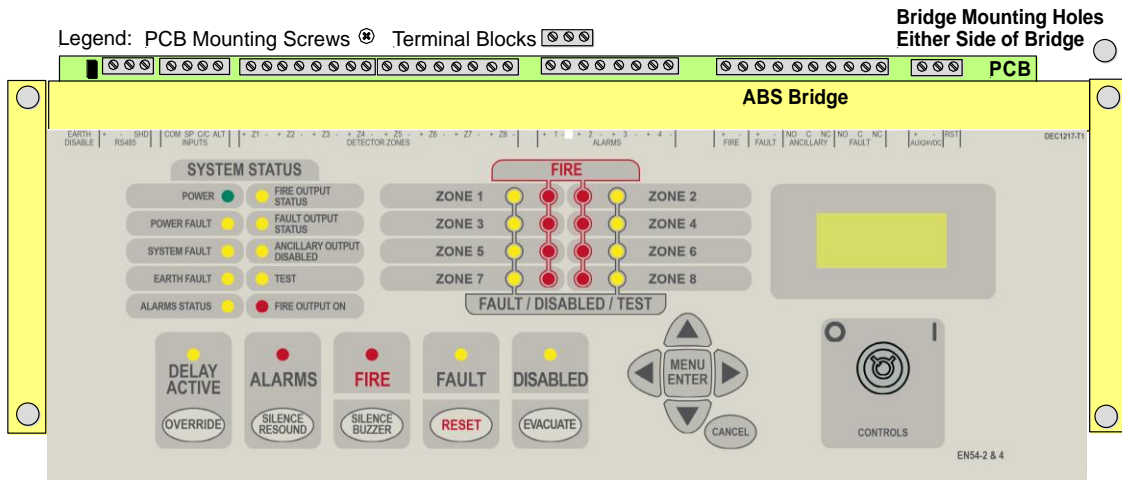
Exploded Front View of Membrane, Bridge and PCB for the ABS Model
